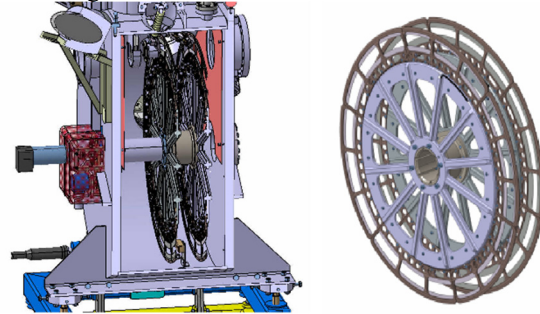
S3 Vacuum chamber assembly with wheel [7].
